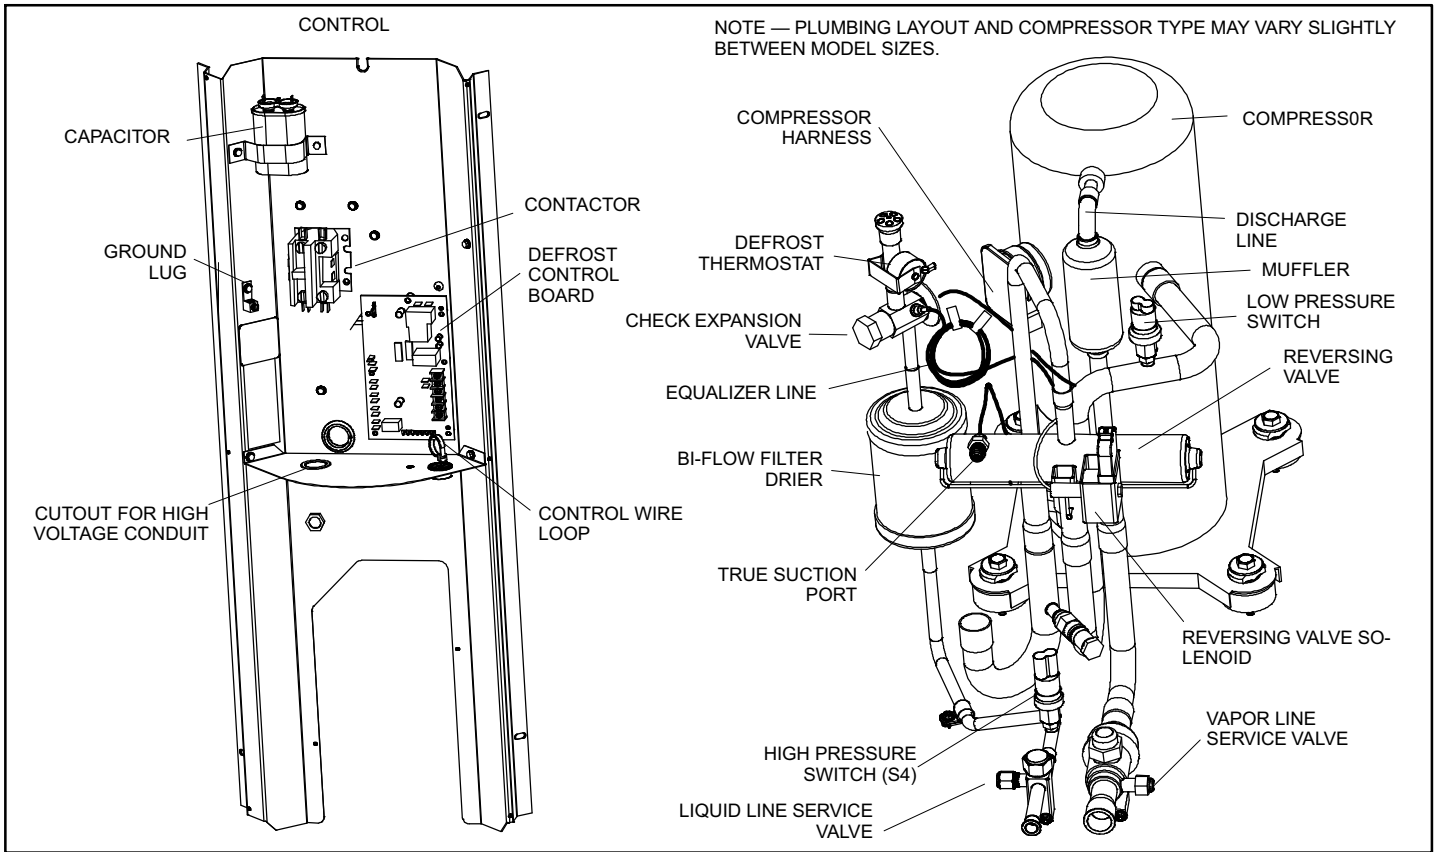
Typical Unit Parts Arrangement (14HPX-XXX-230-01 through -012)
